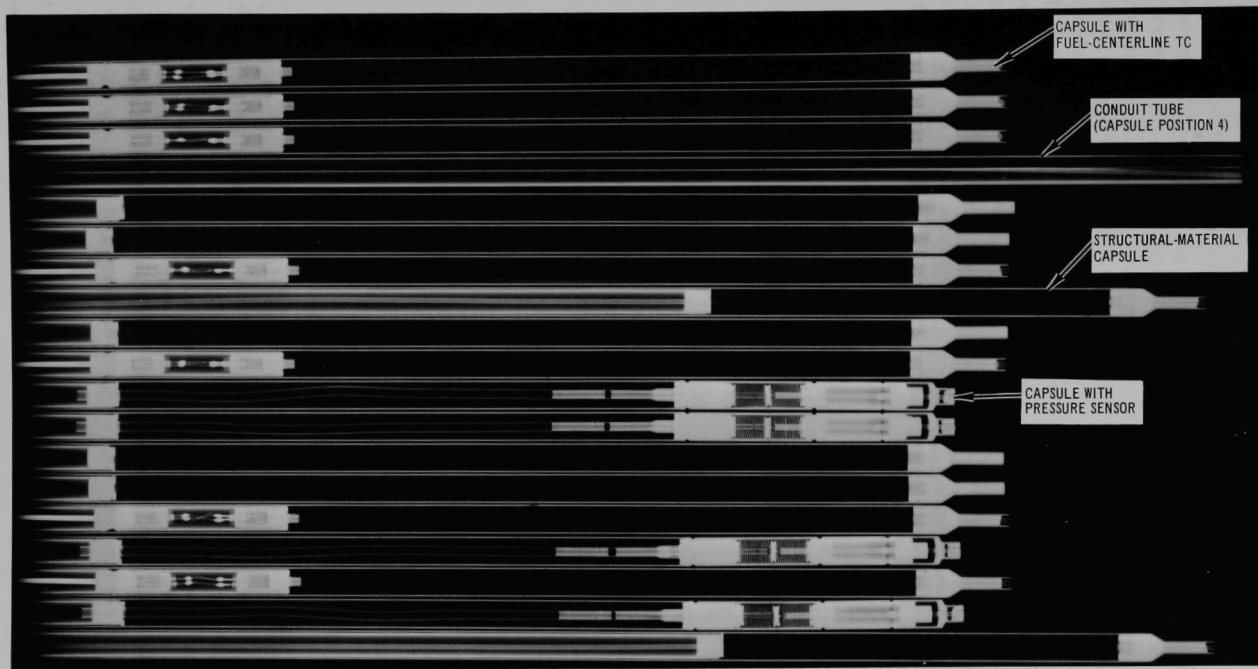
Radiograph of Top Portion of Completed Capsules for Subassembly XX01
